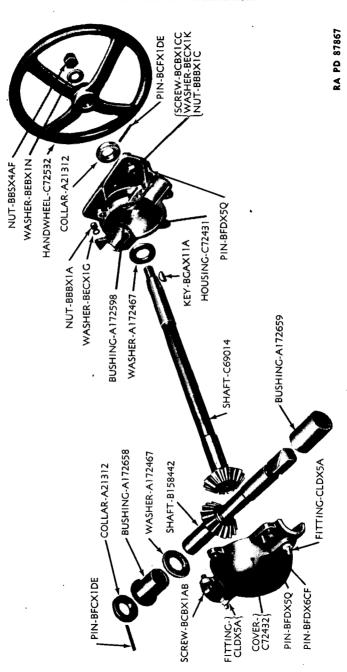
Cradle and Elevating Mechanism Housing, Cross Shaft, and Handwheel Cross Shaft — Exploded View
